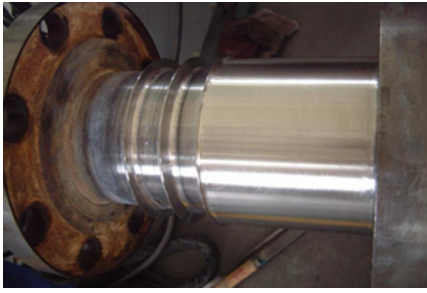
The conditions of atmosphere bearing location after laser remanufacturing.
